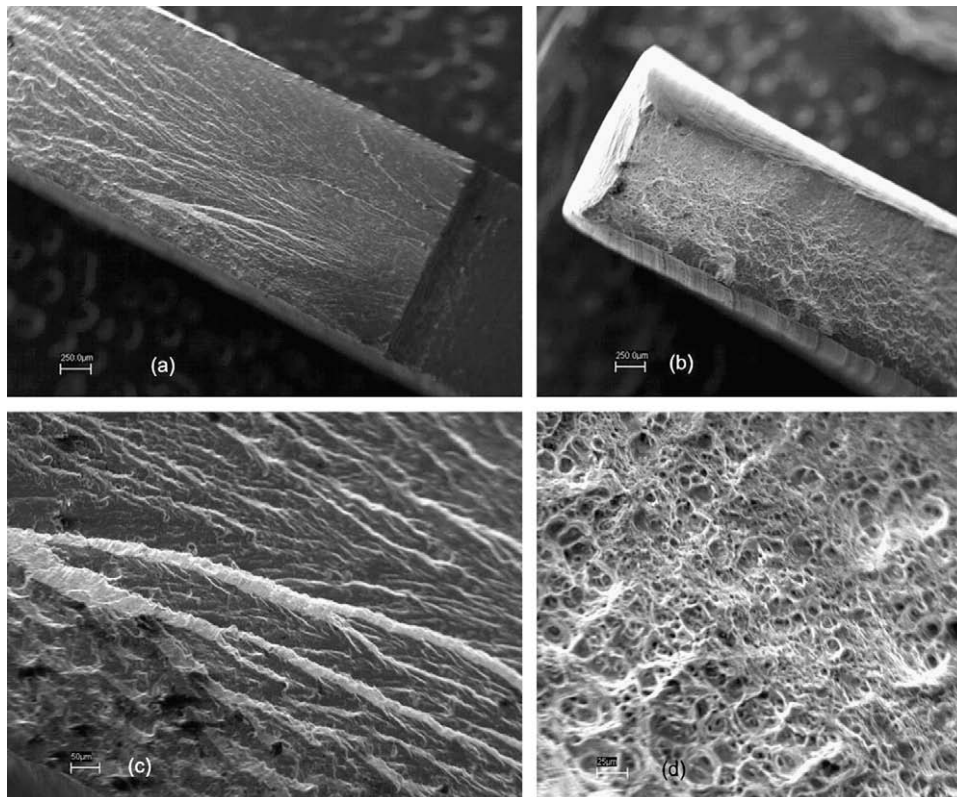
Fracture surface of the specimen welded at 1600 RPM, 230 mm/min.
